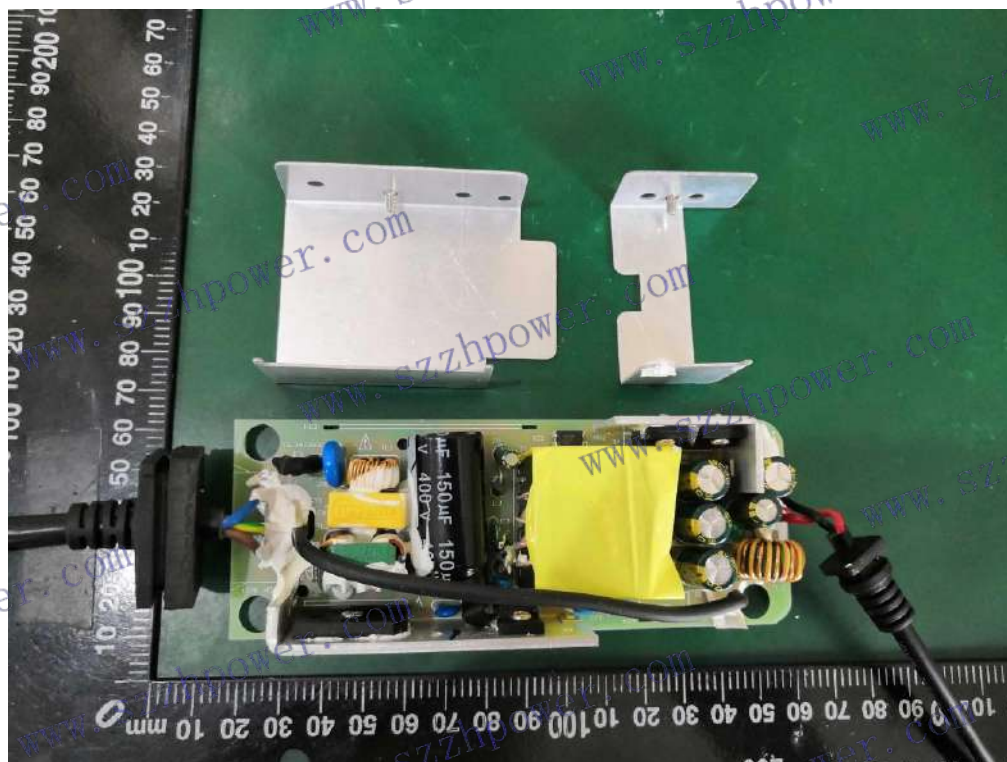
Top view of PCB for models ZH100DU-xxxxyyyWz, KS100DU-xxxxyyyWz
